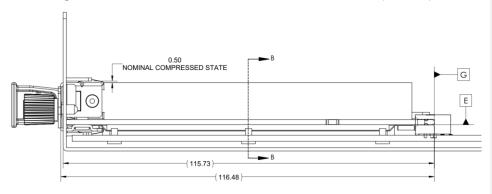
SFF Baseboard Chassis to Ejector lever Card CTF Dimensions (Side View)
